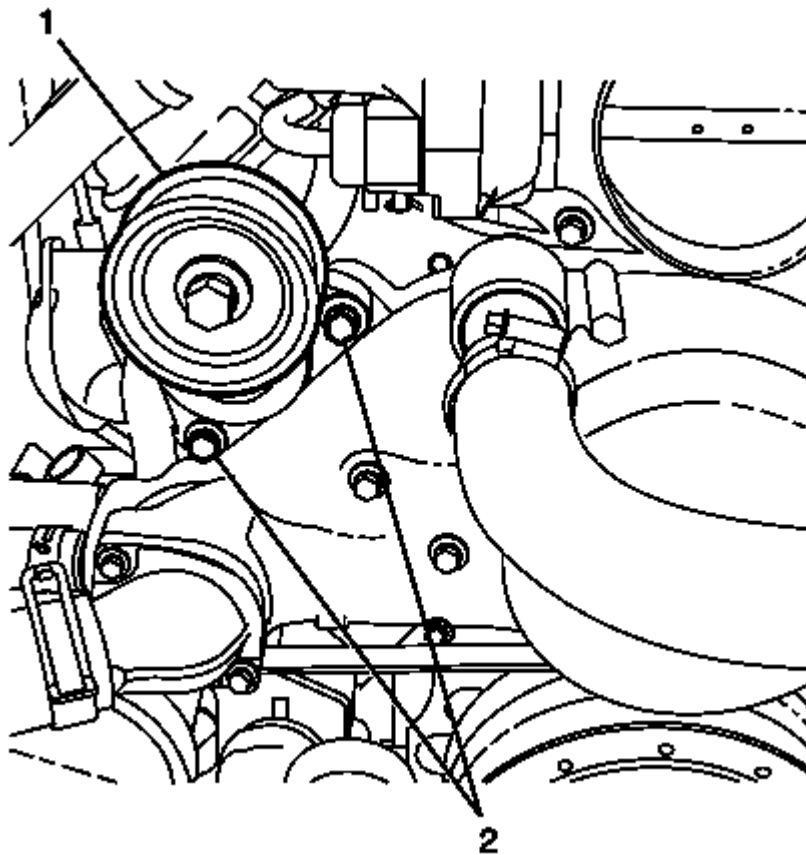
Identifying Accessory Drive Belt Tensioner To Cylinder Head Retaining Bolts
